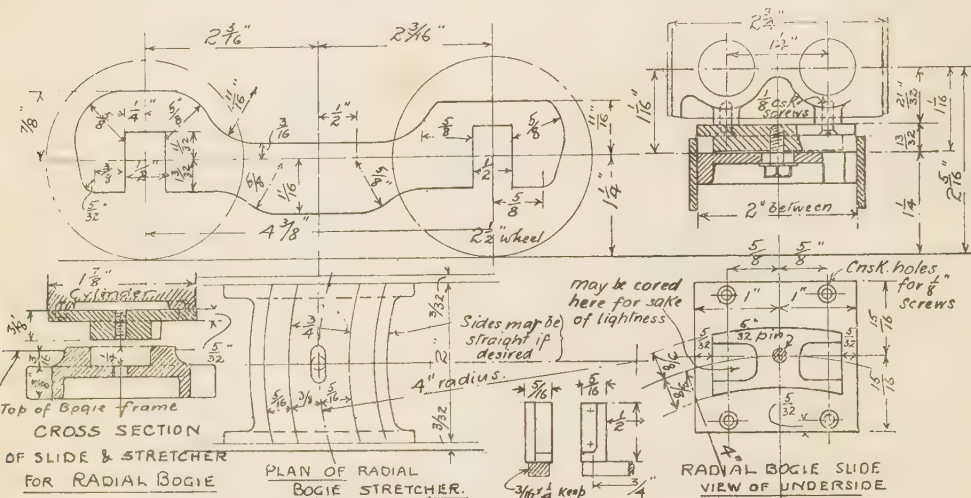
DETAILS OF RADIAL TRUCK FOR MODEL L.N.W.R. LOCOMOTIVE.
